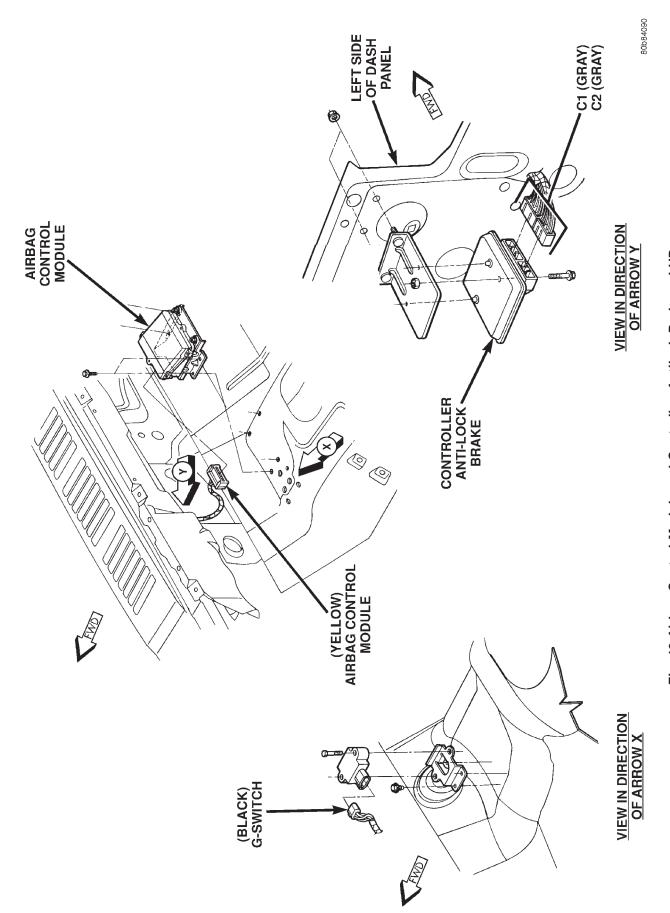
Airbag Control Module and Controller, Antilock Brakes-LHD
